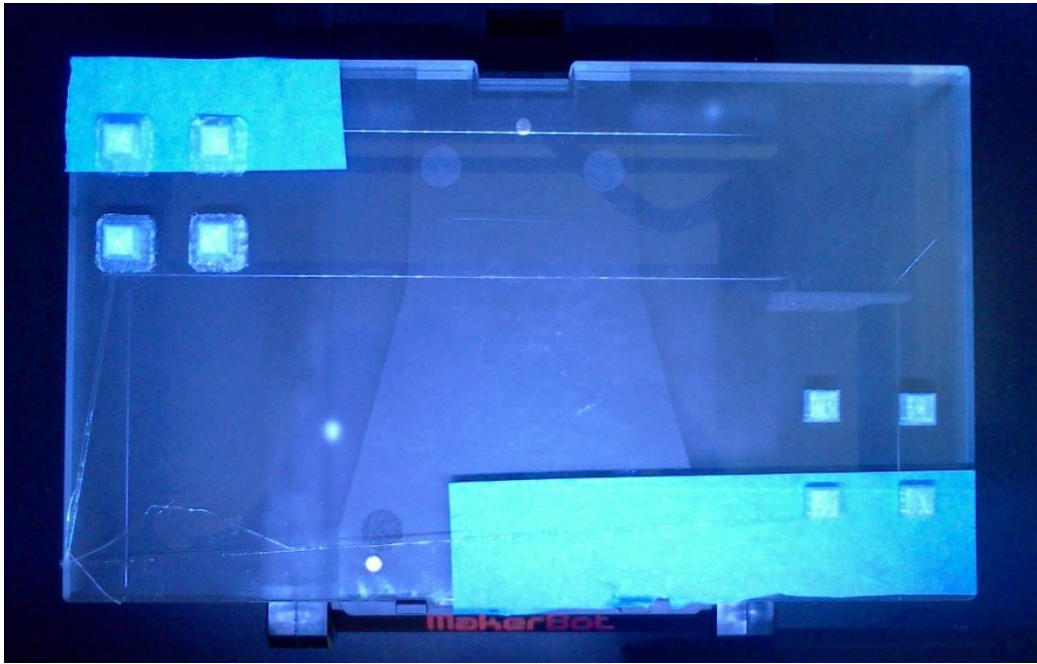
Acrylic build plate with test parts printed with and without blue painters tape
